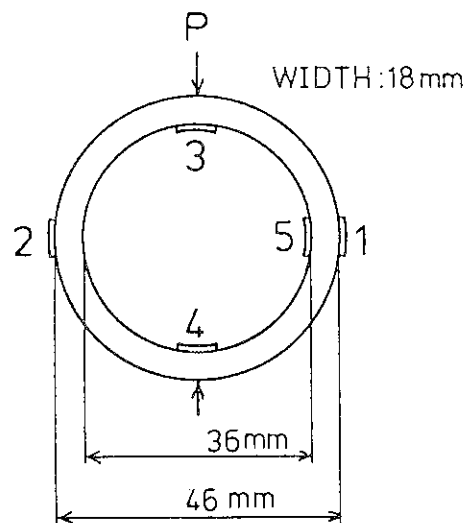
Ring compressive test specimen and the locations of strain gages glued to it.
